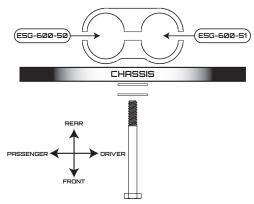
E5G-600-62 Hardware Pack Arrangement
